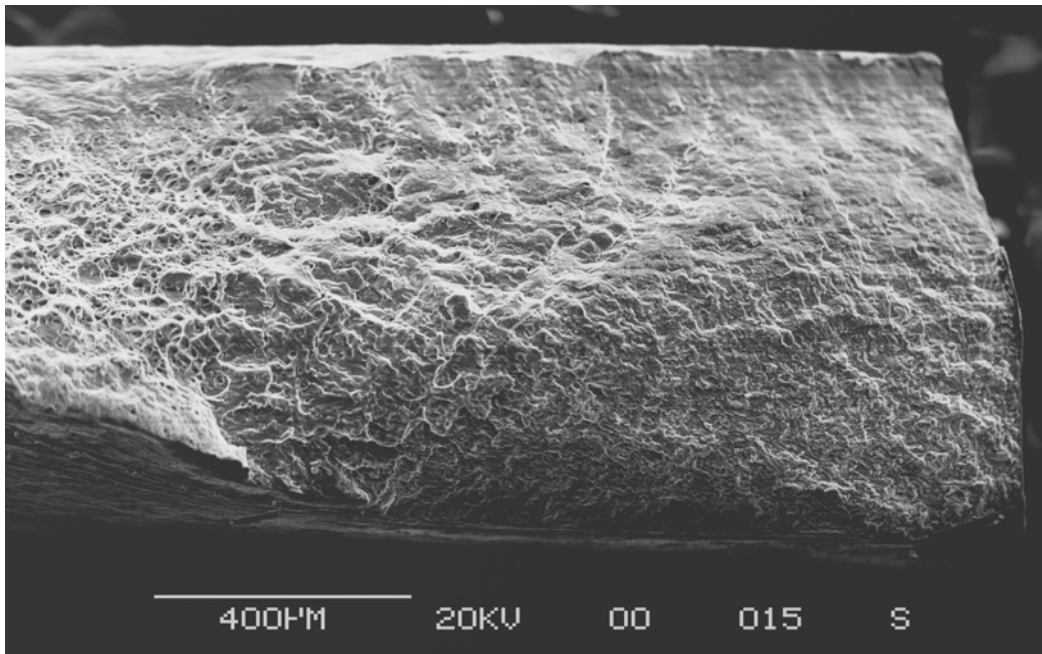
Fatigue Crack on Fracture Surface of Specimen 5607.
